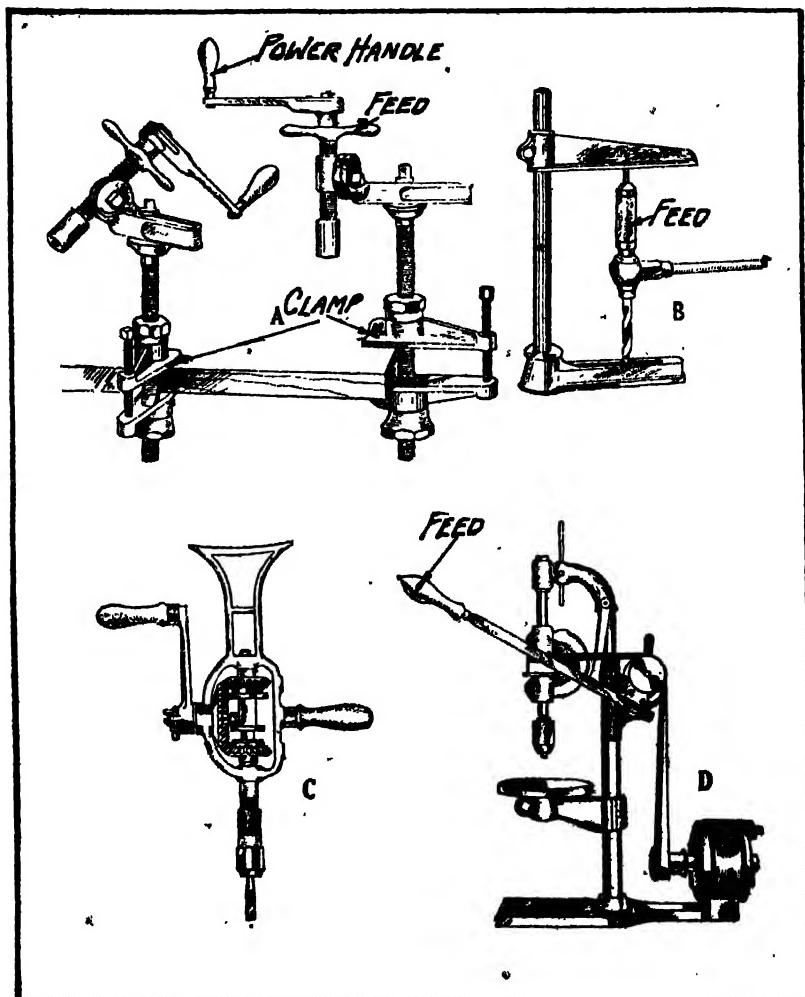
Showing Practical Application of Ratchet and Hand Feed Drilling Machines.
